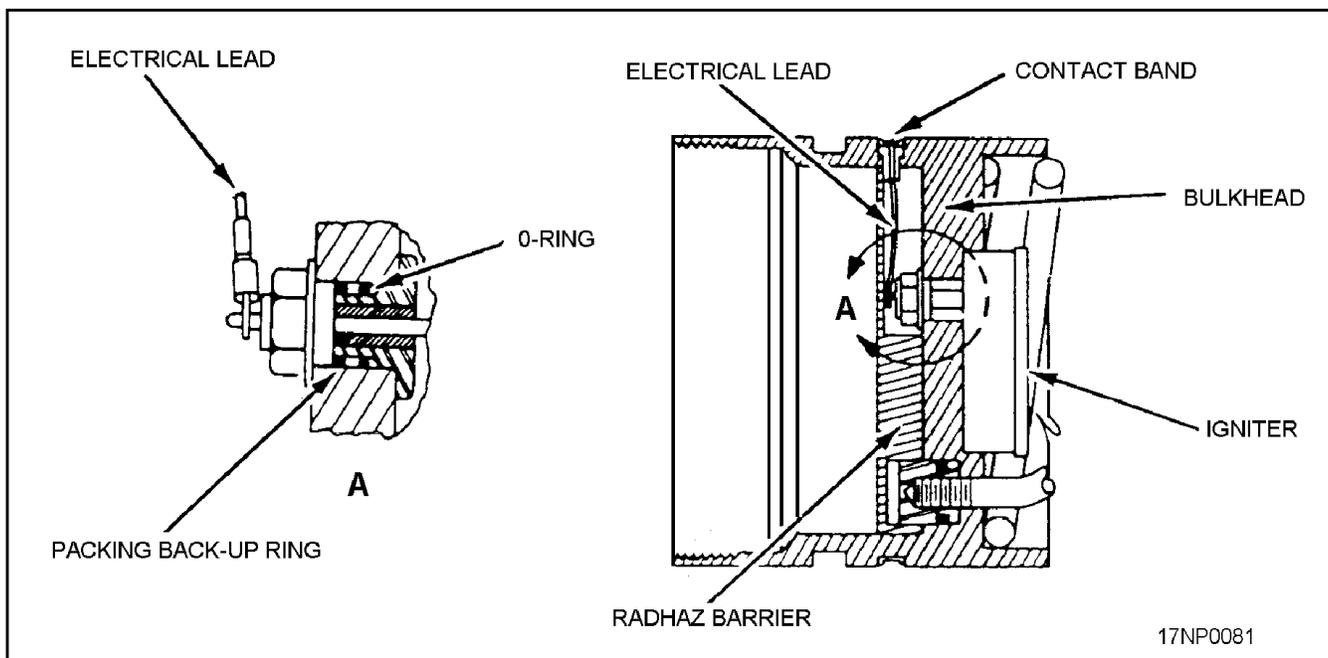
Typical center electrical lead wire connection (5.0-inch motor).
